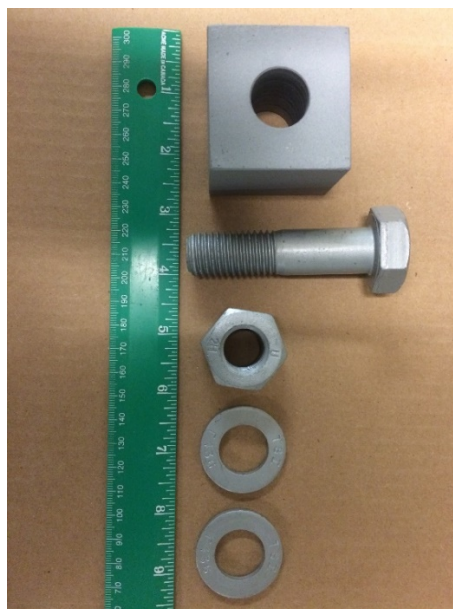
Coated specimen bolt 3/4-10 x 3 with matching nut, washers and test block
